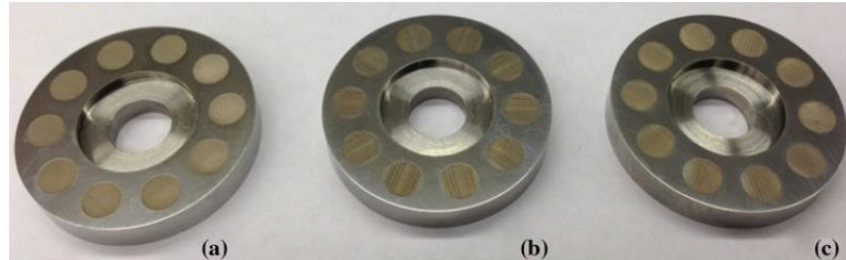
Specimen of large dimples; (a) R-shaped, (b) T2-shaped and (c) T1-shaped [39].
